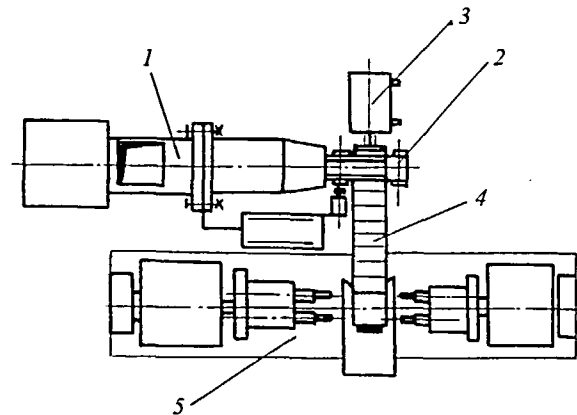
Packaging of the equipment for shaping fuse cases with blind thread holes.
